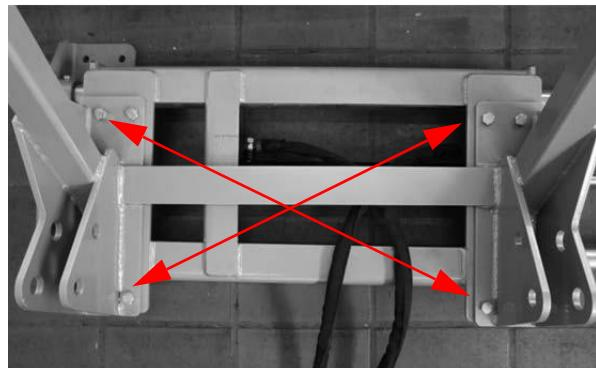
Mounting bracket attached to hydraulic lateral shifter using 8 screws, nuts and washers.
